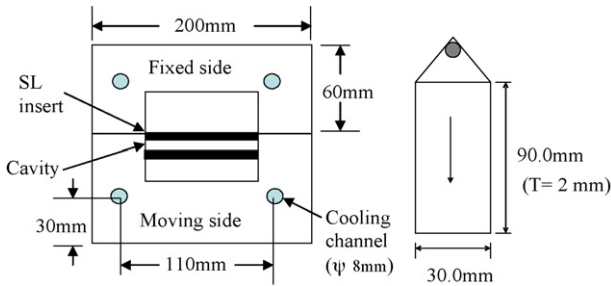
Cross-sectional view of the SL mold and molded part.
